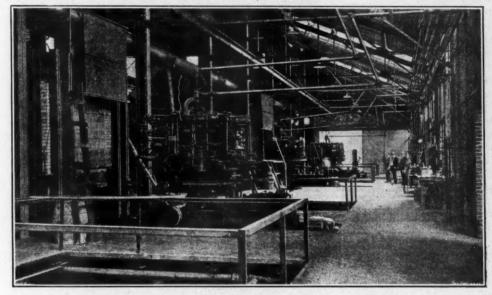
FIG. I. BOTTLE FACTORY SHOWING THREE MACHINES
